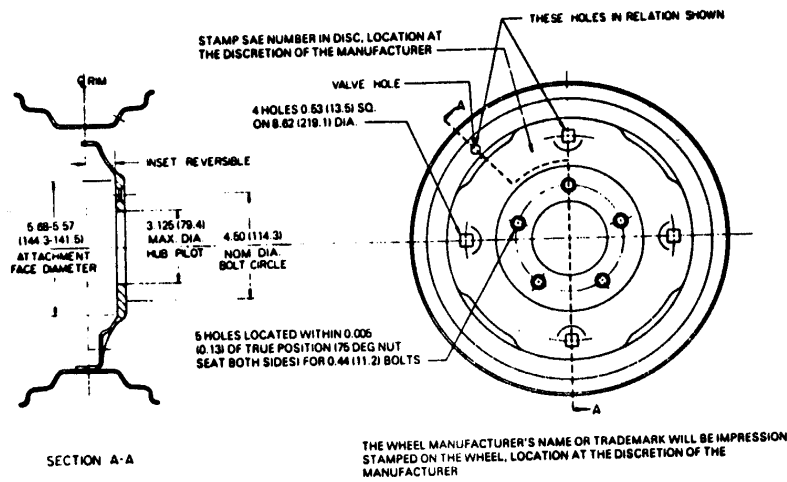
5 BOLT, 4.5 IN. BOLT CIRCLE GROUP
